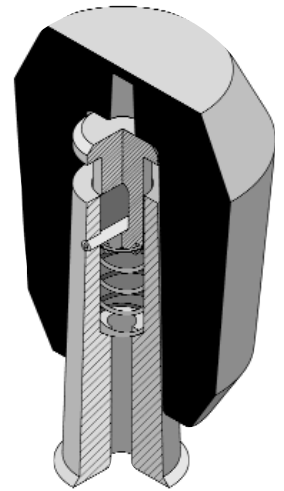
Sectioned spring loaded steel location pin for ram-up of a V-sleeve without a breaker core.
